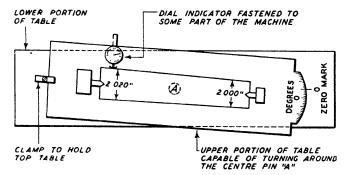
Diagrammatic plan view of method used to set the table of a cylindrical grinding machine
